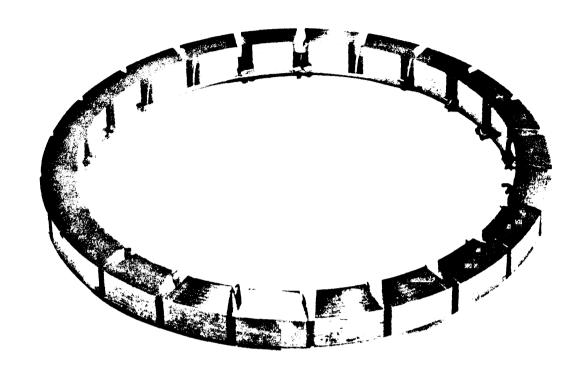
Partly completed mild steel spacers for use in the composite grinding wheel
